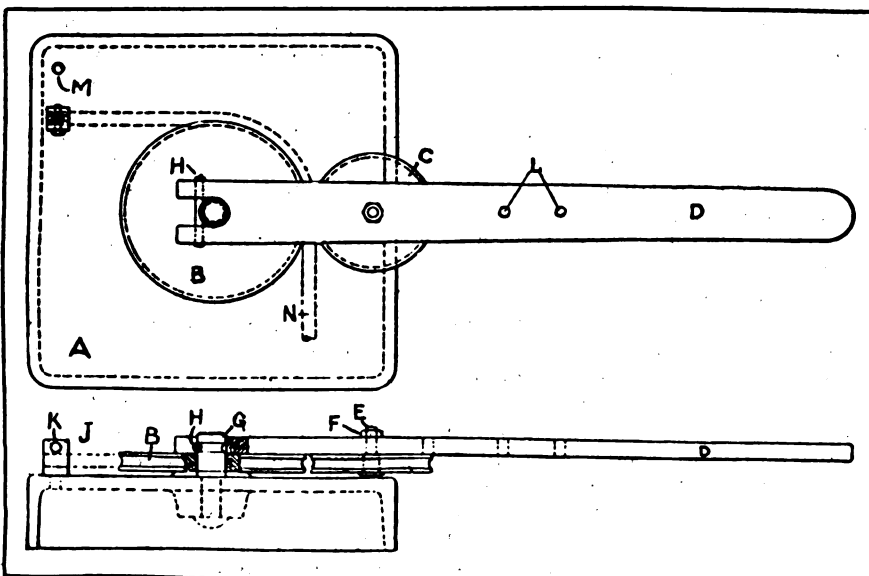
HOLLOW TUBES OR SOLID RODS MAY BE BENT ON THIS EASILY MADE BENDING MACHINE
